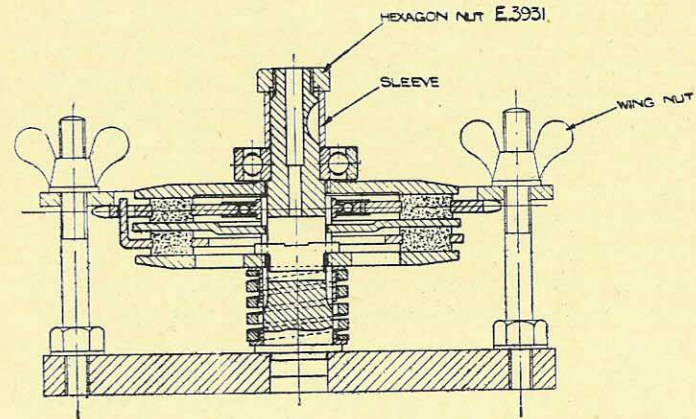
CLUTCH-ASSEMBLY FIXTURE.
